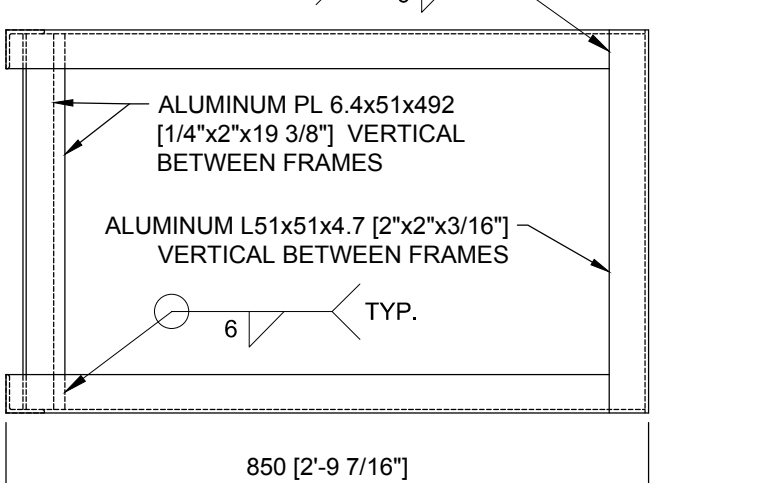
DAYBOARD MOUNTING FRAME SCALE: 1:20
